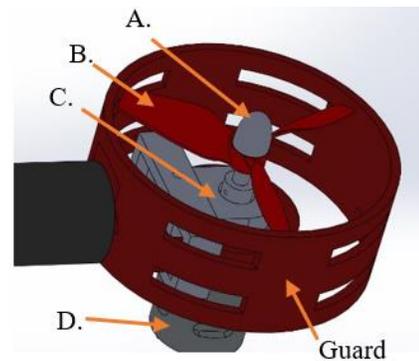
Rotor assembly. Cap(A). Rotor (B). Encoder(C). Motor (D)
